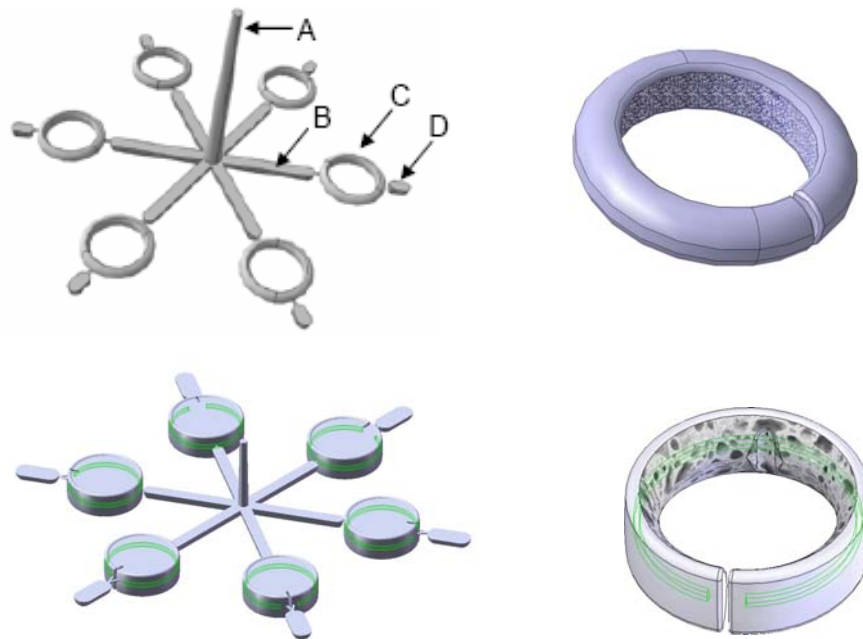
Injection molded parts and single implant after cutting from two molds
